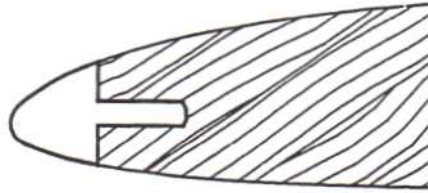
SECTION VIEW OF BLADE TIPPING
